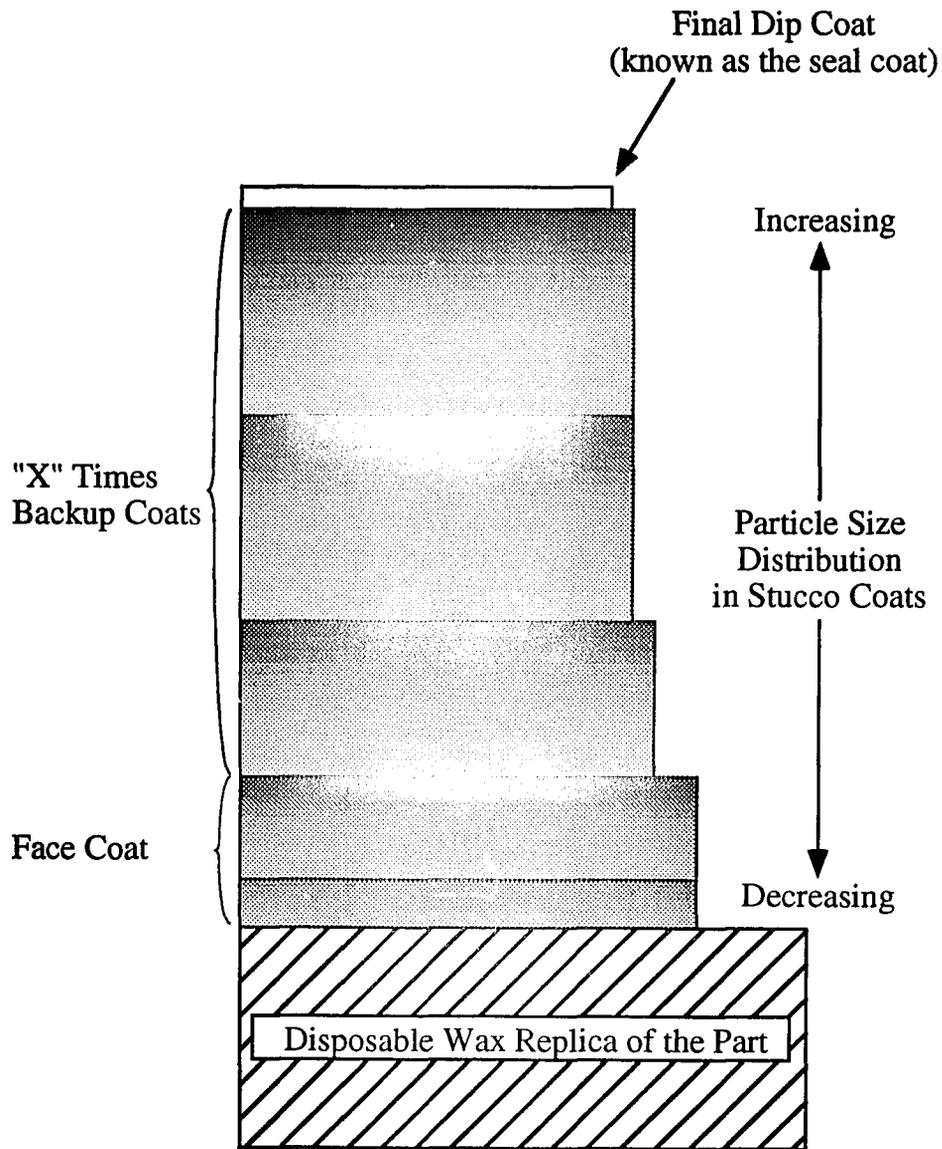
Cross section of a completed investment shell mold prior to pattern removal.
